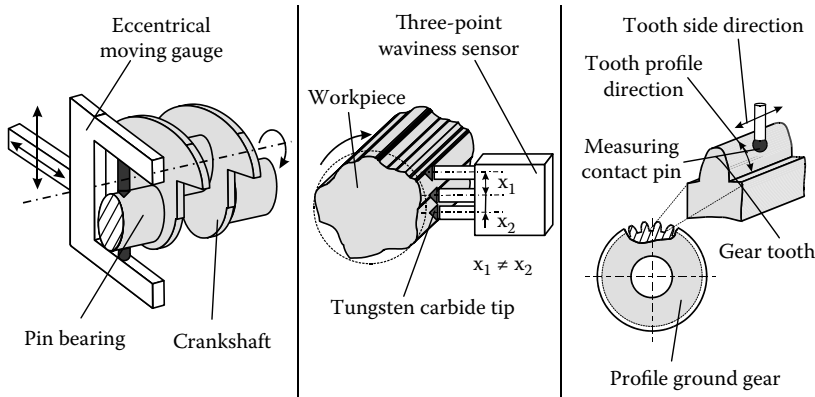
Contact sensor systems for workpiece macrogeometry.
